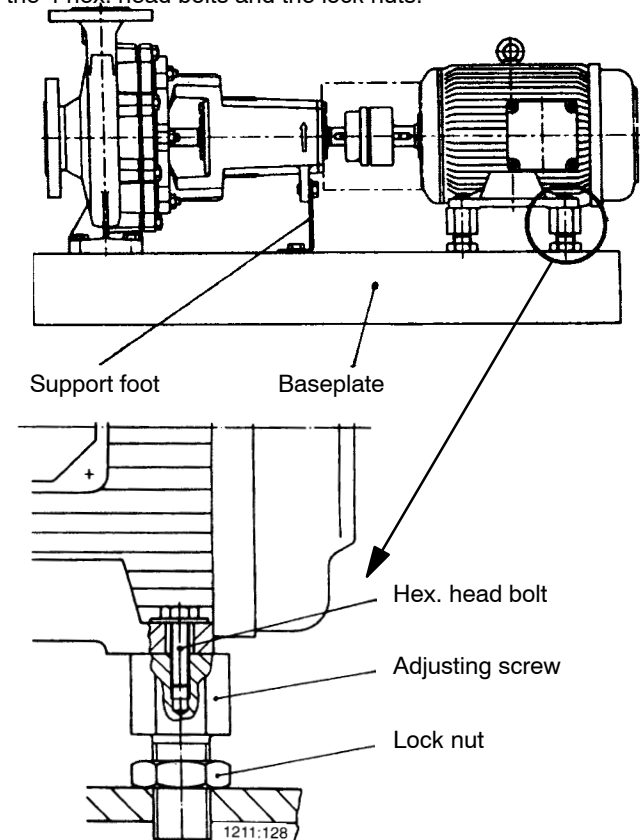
Aligning the motor by means of adjusting screws
